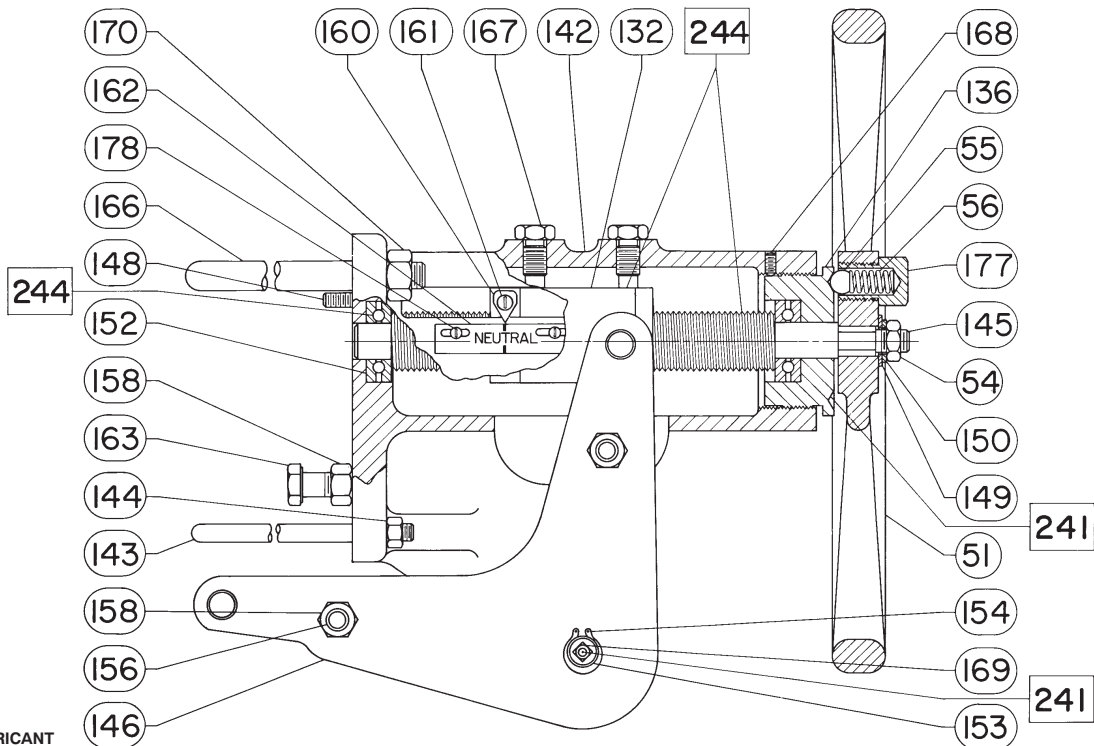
Top-Mounted Handwheel Assembly for Size 70 and 87 Actuators
